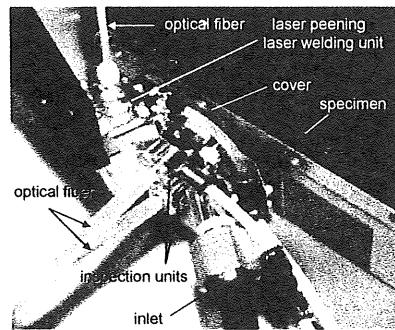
Laser-induced leaky waves testing experiment with multifunction laser welding head
